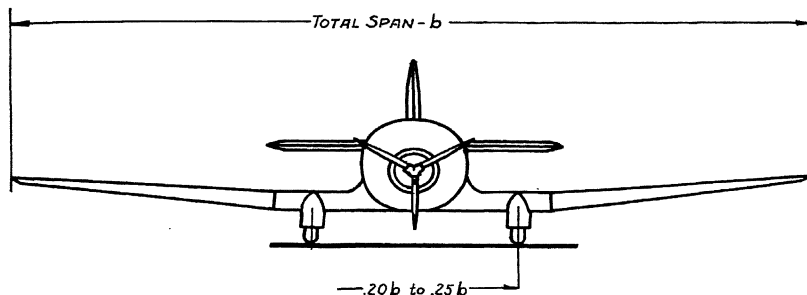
B. RECOMMENDED WHEEL TREAD FOR A
